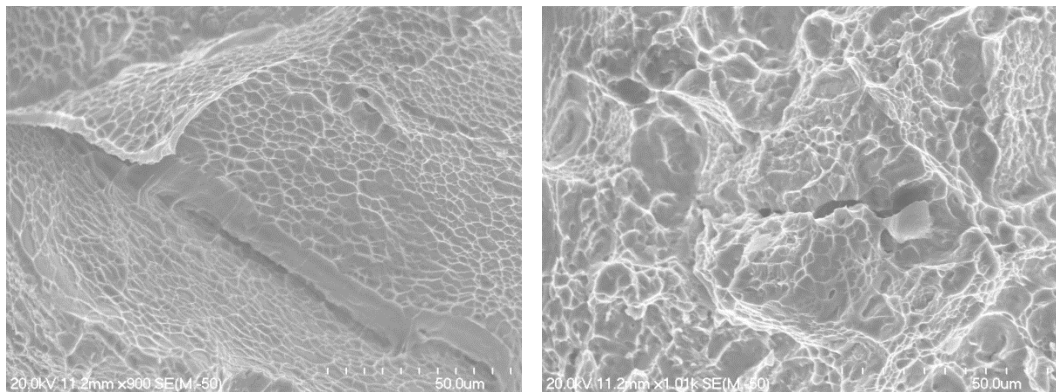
Fracture surface of G2 (1000mm/s)
